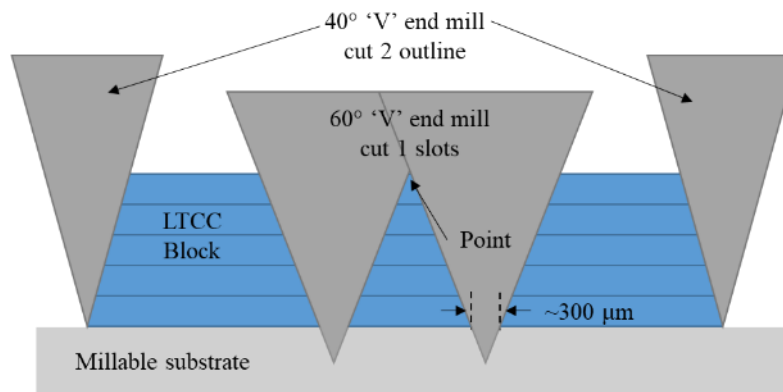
Mill cutting cross-sectional diagram of the facet plate.
